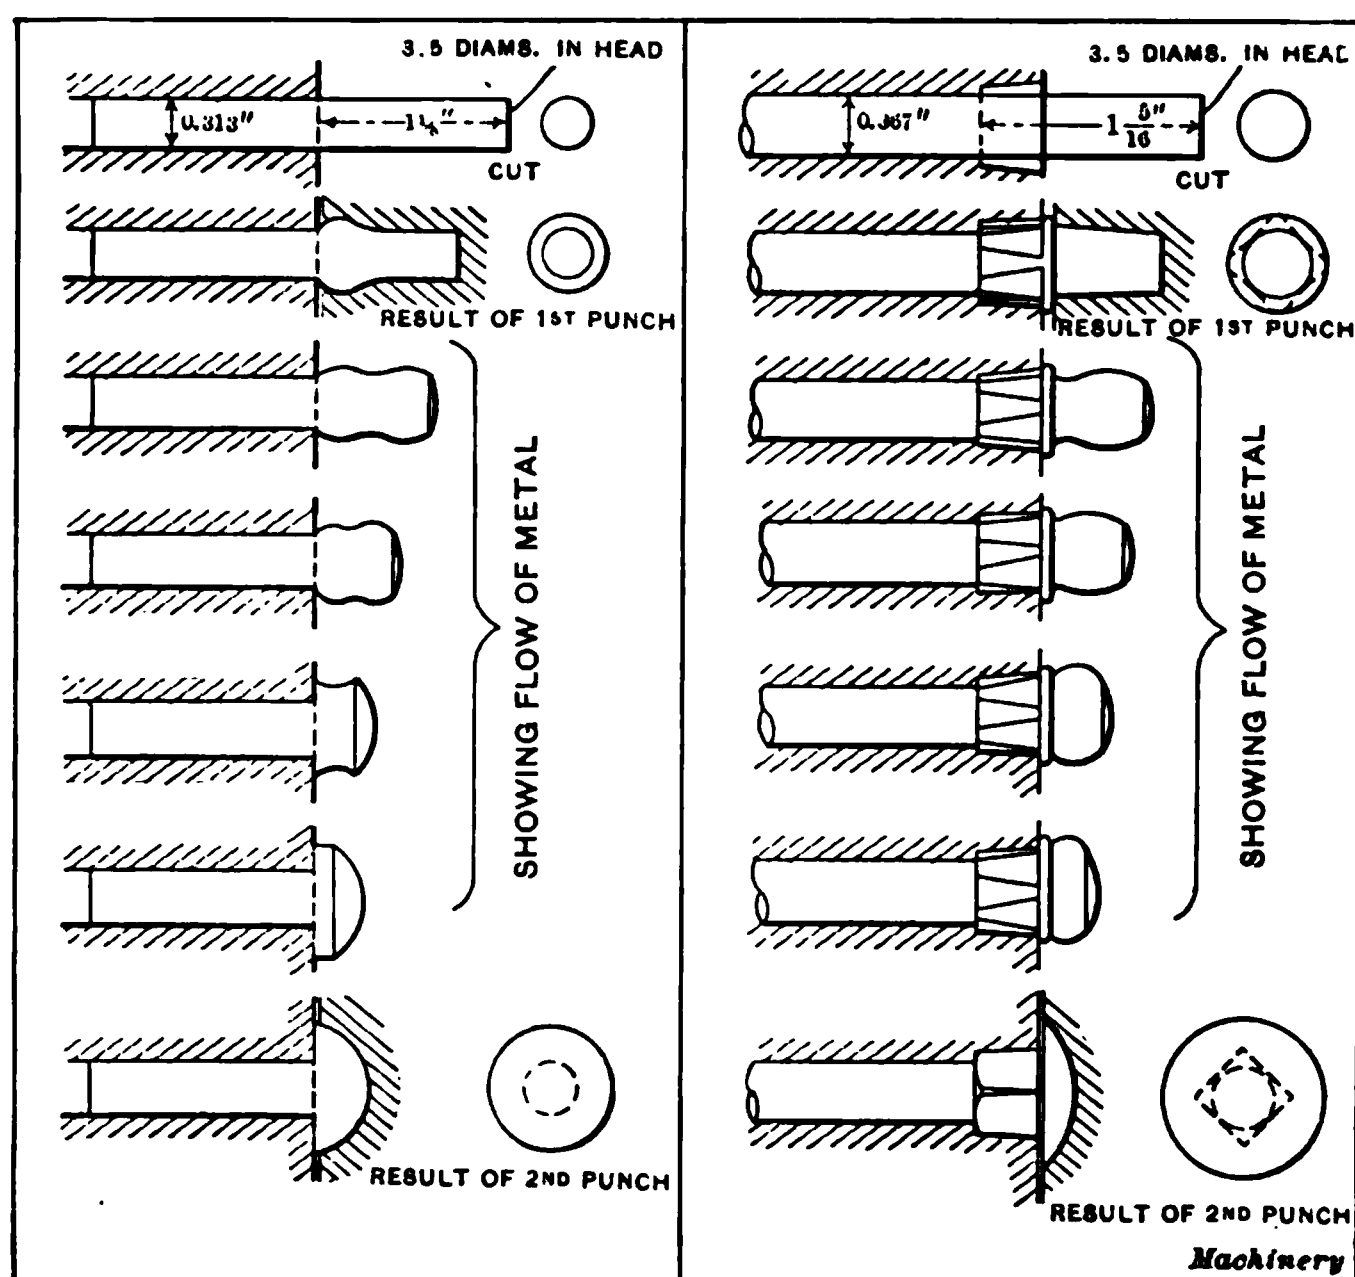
Evolution of Screw Blanks made on Double-stroke Cold-headers
